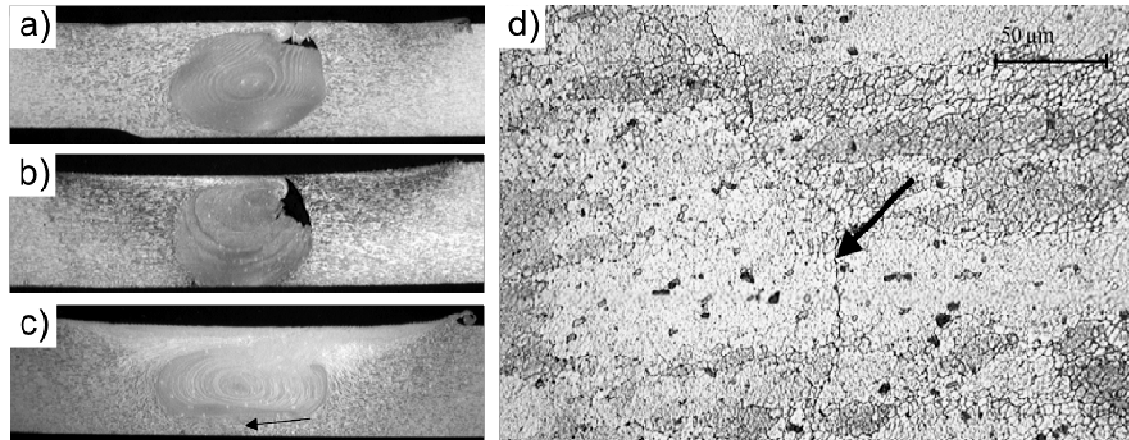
Different weld defects, which may arise from poorly adjusted welding parameters. All examples are from welds made in 6 mm AA2014; (a) tunnel defect below weld surface on advancing side, (b) surface breaking tunnel defect, (c) macrograph of a root flaw which is magnified in (d) (Leonard *et al.* 2003).
